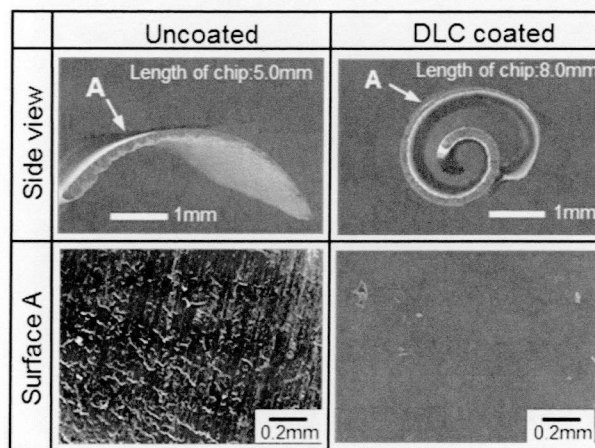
The comparison of chips after milling test (workpiece: A5052).
